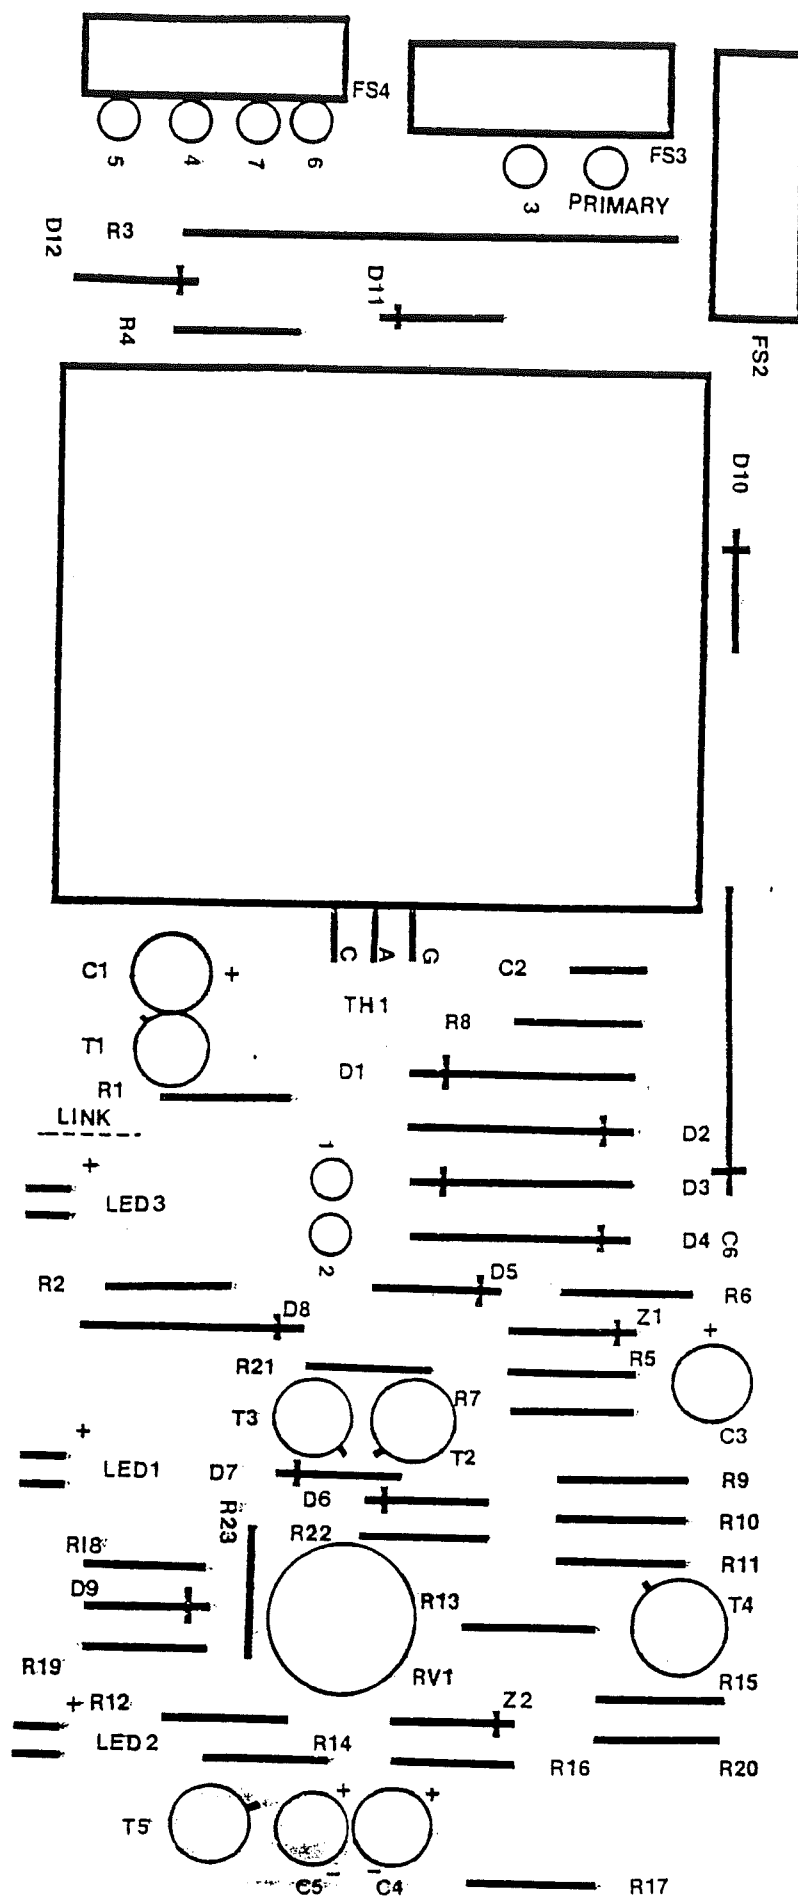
Type 24/10 Charger - P.C.B. Layout.
